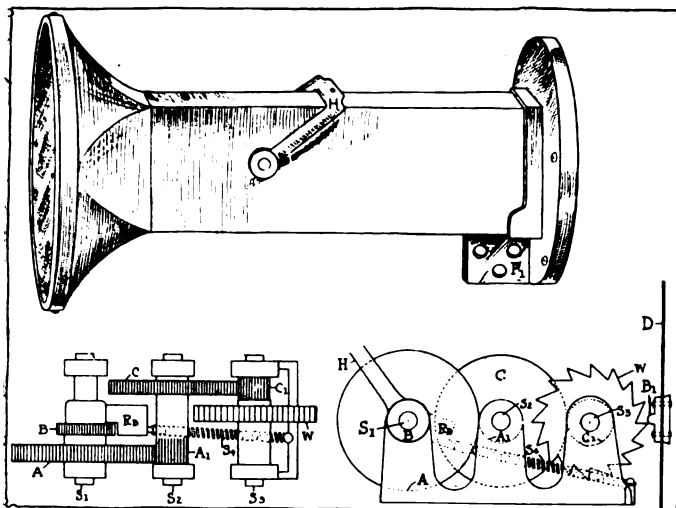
Outside view of Reliance hand-operated, ratchet-and-button horn. Fig. 3—Schematic view of gears by means of which horn is operated
